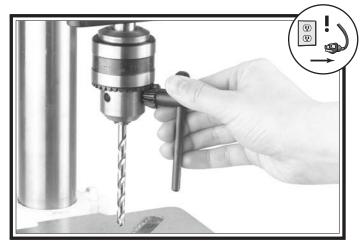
Example of tightening chuck with chuck key. (Always remove chuck key after use.)
